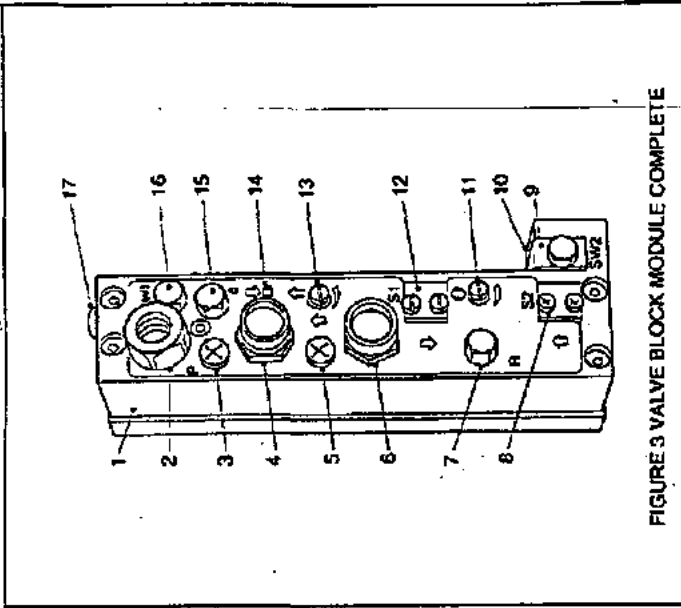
VALVE BLOCK MODULE COMPLETE
